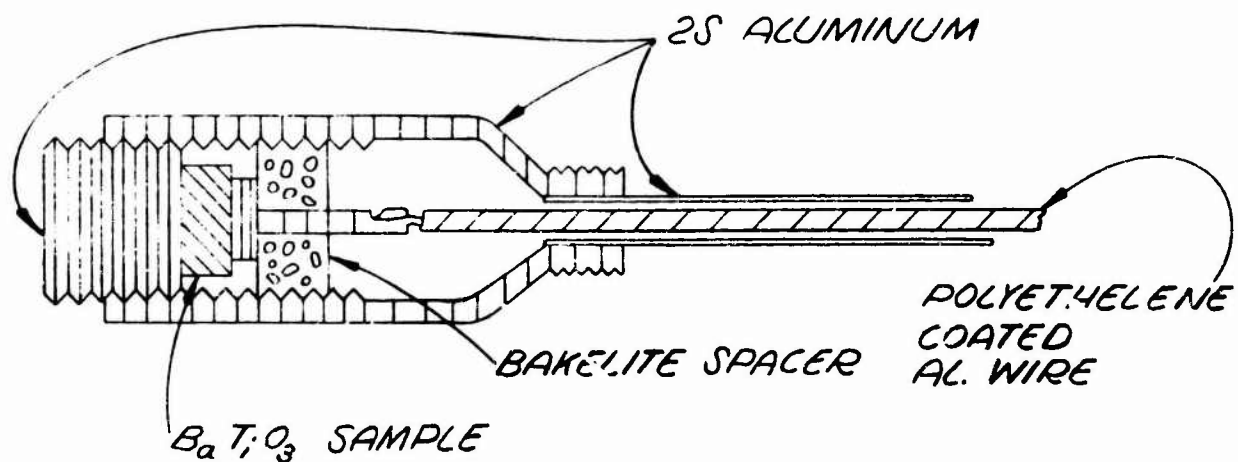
MODIFIED COAXIAL SAMPLE HOLDER
